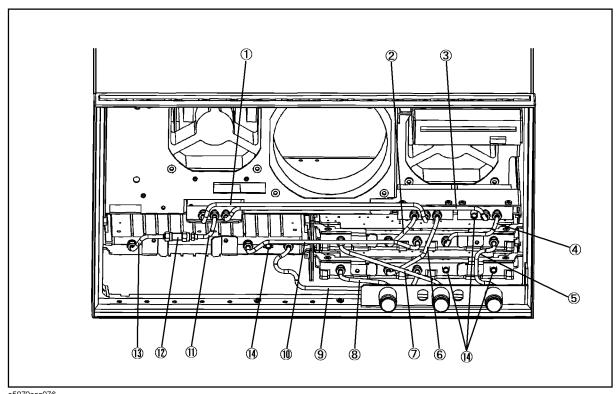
Front View (Semirigid Cables) (Opt. 313)
